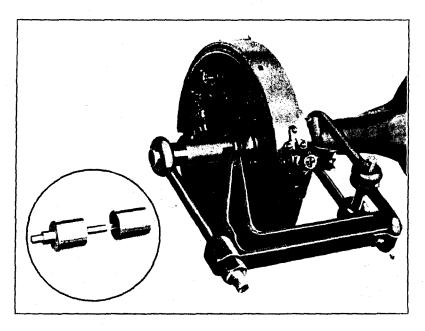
Straightening Rear Axle Sleeve with Tool 71971 (Cross-hair sights shown in circle)
